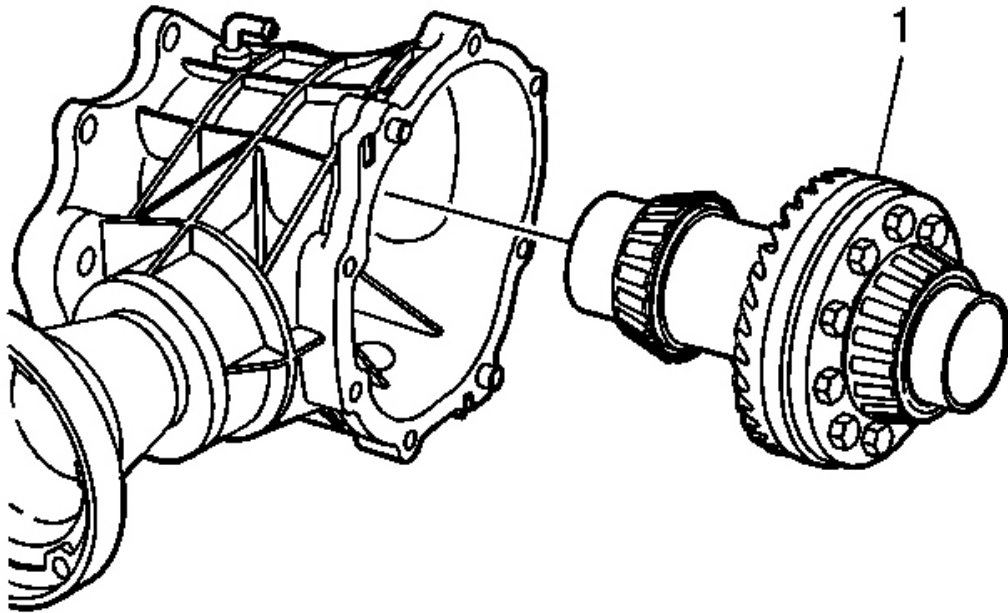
Removing/Installing Carrier Assembly From The Housing
